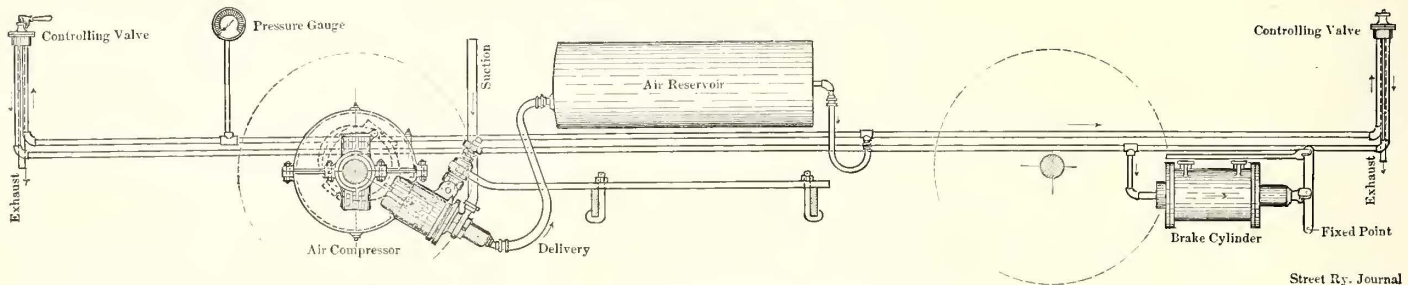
AIR BRAKE EQUIPMENT FOR SINGLE CAR.
